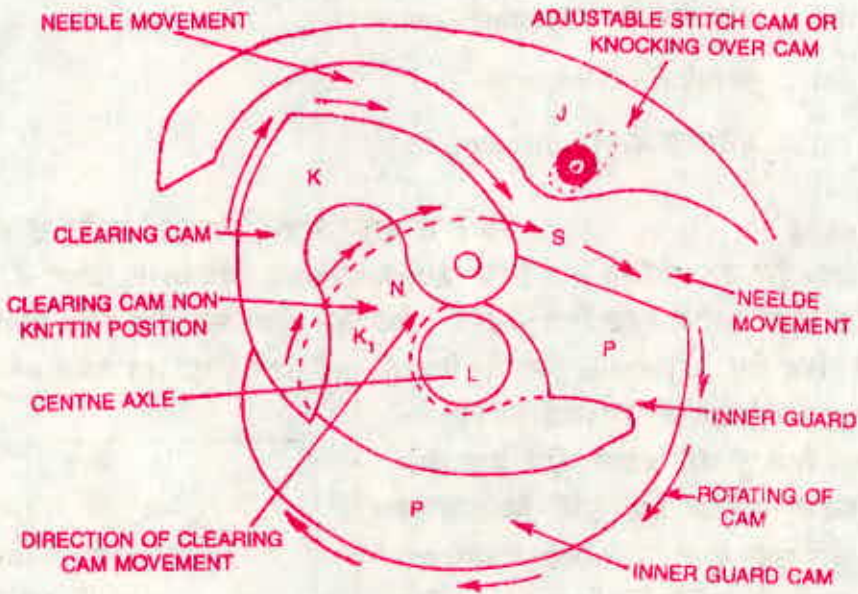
Dial cam set of Hand Driven Socks knitting machine.
